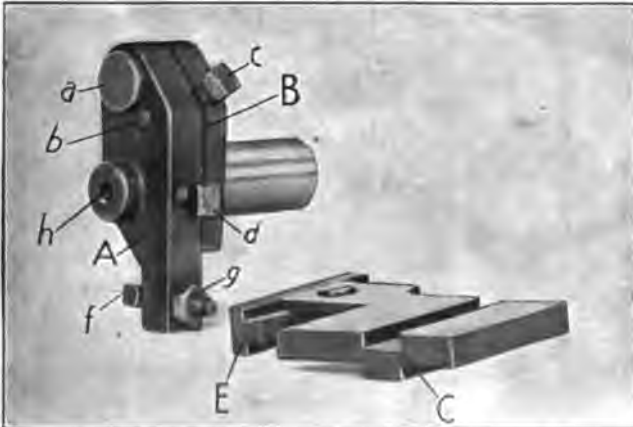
B. & S. Swing Tool-holder and Rising Block for Operating it
